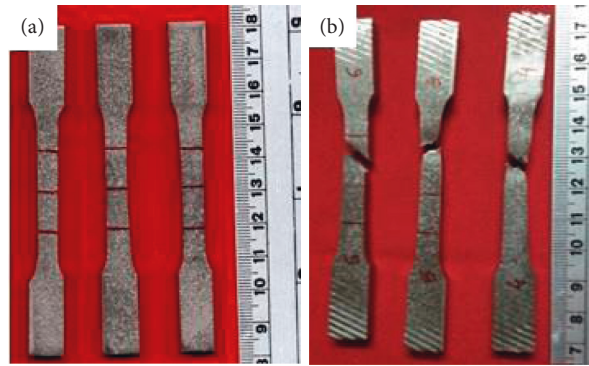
Photograph of tensile specimens: (a) before testing; (b) after testing.
